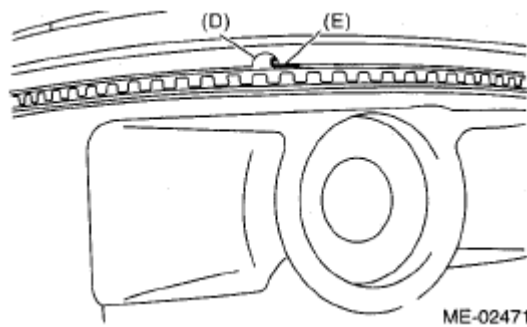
Identifying Upper Rail Spin Stopper (E) And Side Hole (D)
